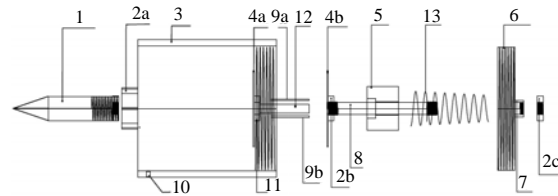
Cross sectional view of the assembled mechanical components of the vibrometer
